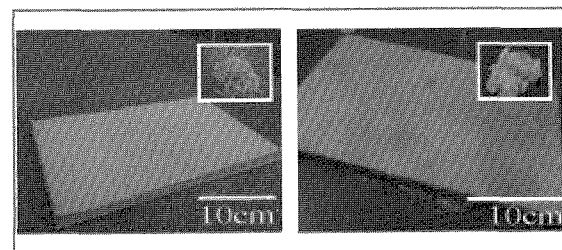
Fabricated boards from copier paper and cotton Left: paper board, Right: cotton board
